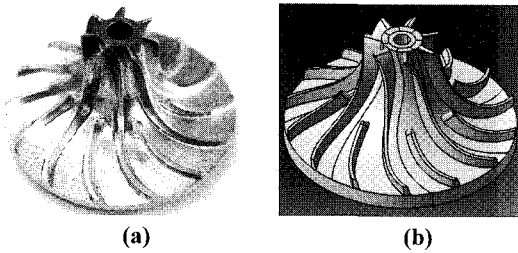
(a) Photograph of an aluminum alloy impeller produced by machining process and (b) model used in FE simulation
